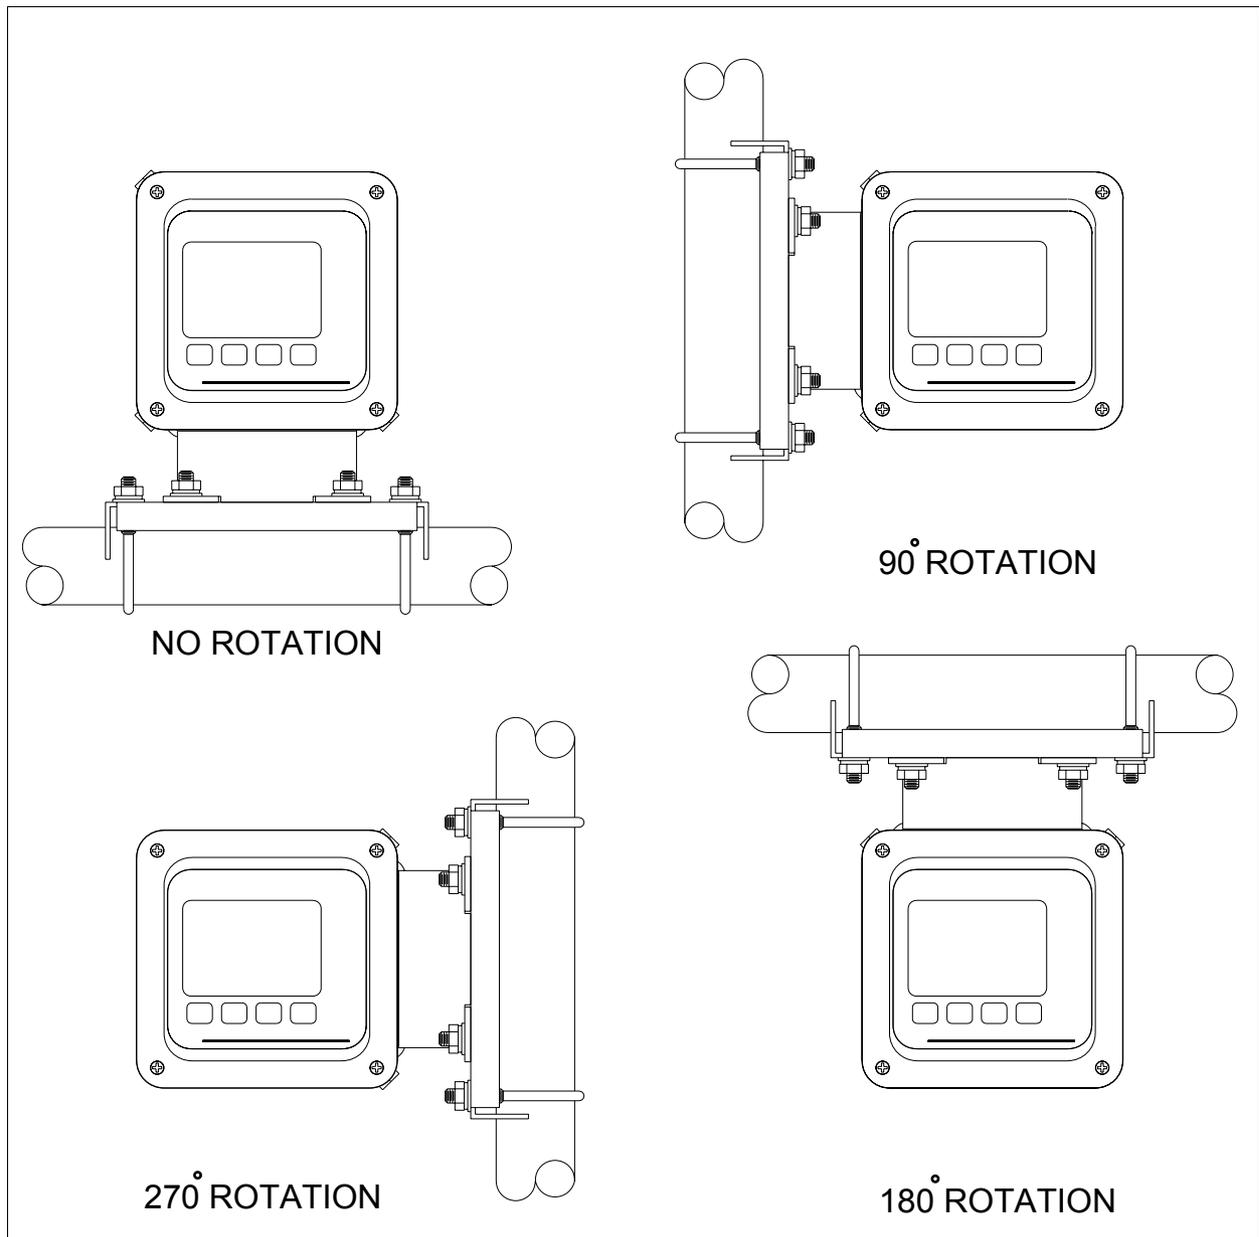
Mounting Rotation (Pipe Mount Shown)
